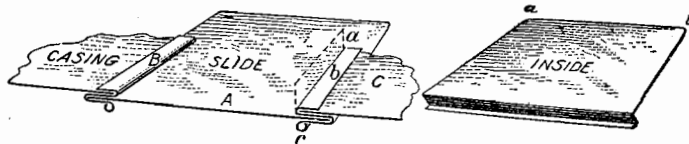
Sectional View Through Clean-Out Slides Fig. 178—The Slide Complete
